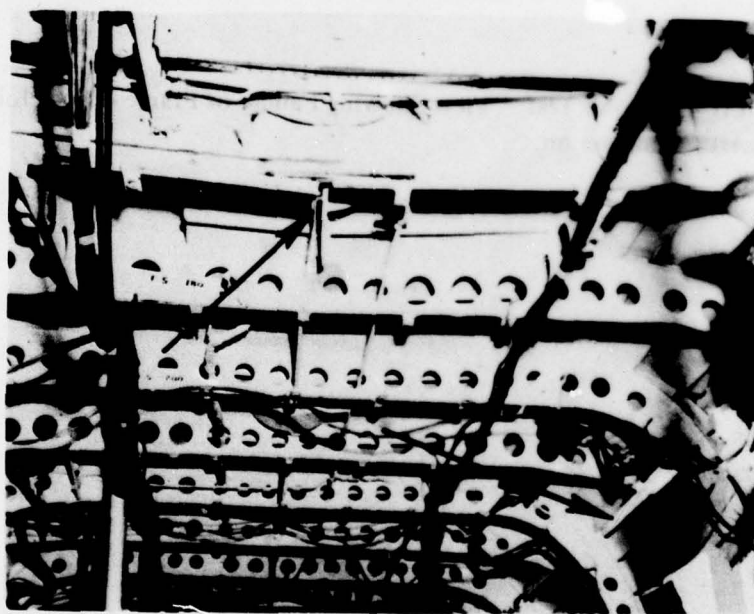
CH-47A Crash Test – Details of Structural Damage in Cabin Crown Area.
